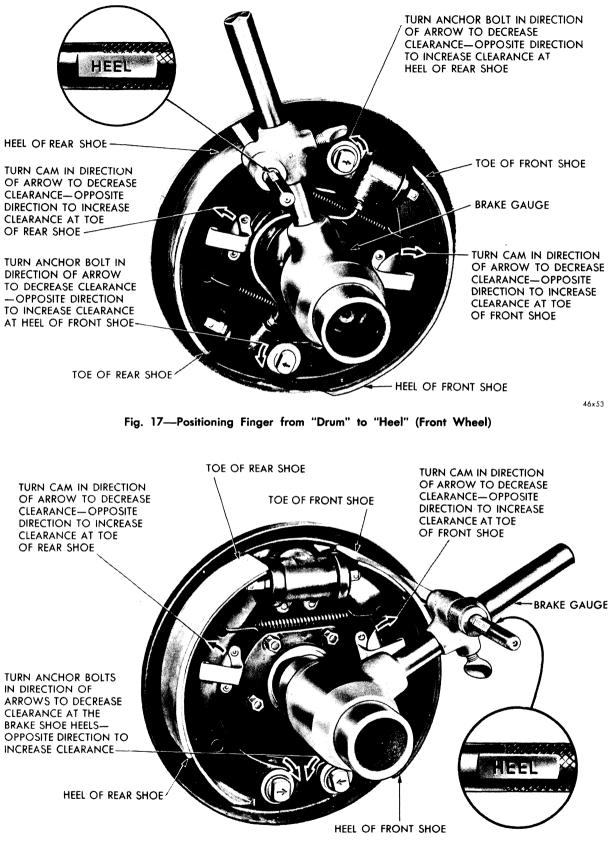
Positioning Finger from "Drum" to "Heel" (Rear Wheel)
